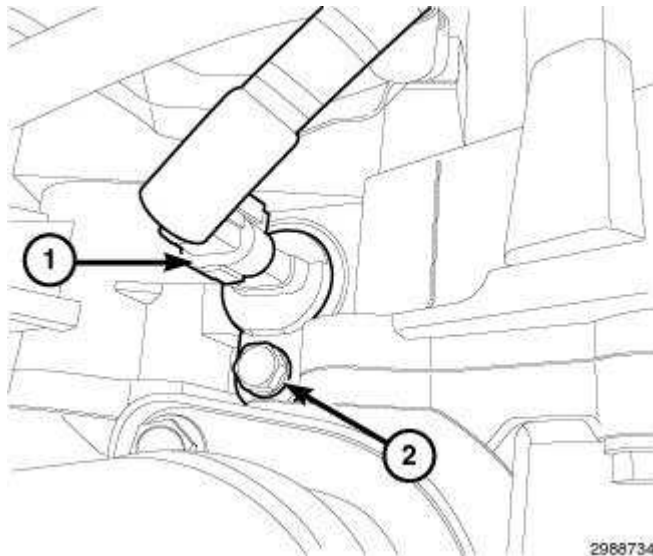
Camshaft Position Sensor Electrical Connector & Bolt
